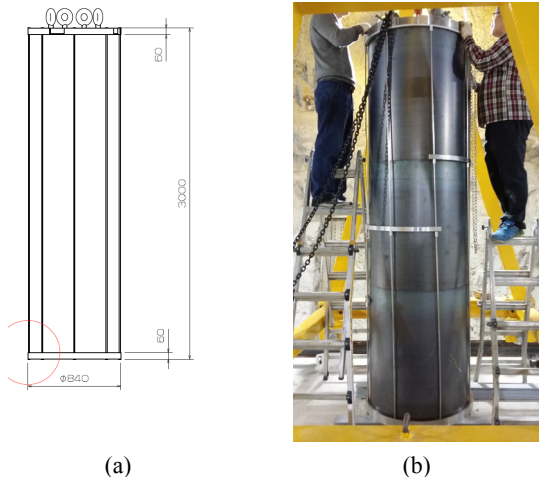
(a) Design drawing and (b) picture of Buffer container.
